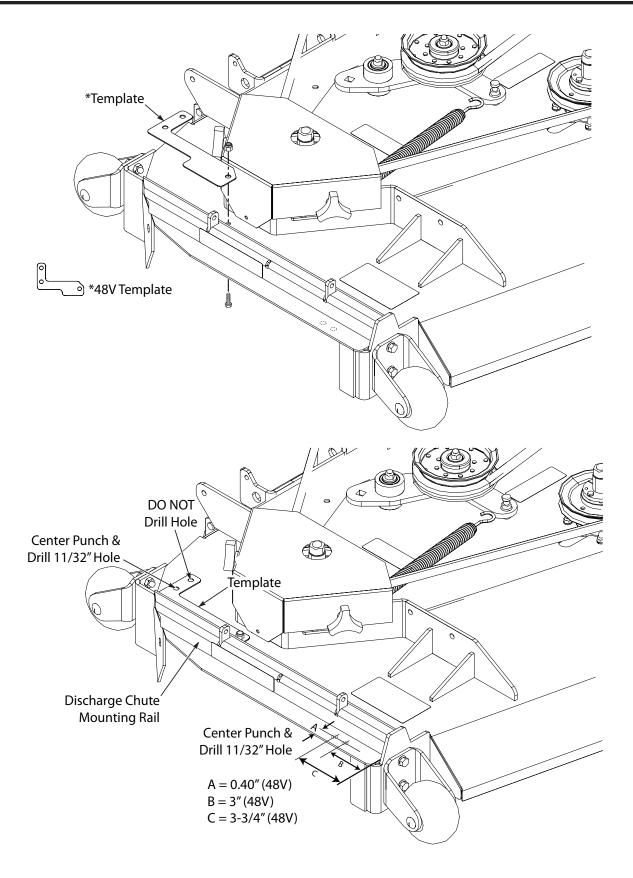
Locating and Drilling the Mounting Holes for SCZ/STC-48V
